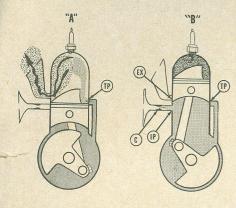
Schematic diagram of two-stroke cycle engine operating on Otto Cycle, Engine differs from that shown in Fig. 1-1 in that piston is utilized as a sliding valve to open and close intake (carburetor to crankcase) port (IP) instead of using reed valve (R—Fig. 1-1).
